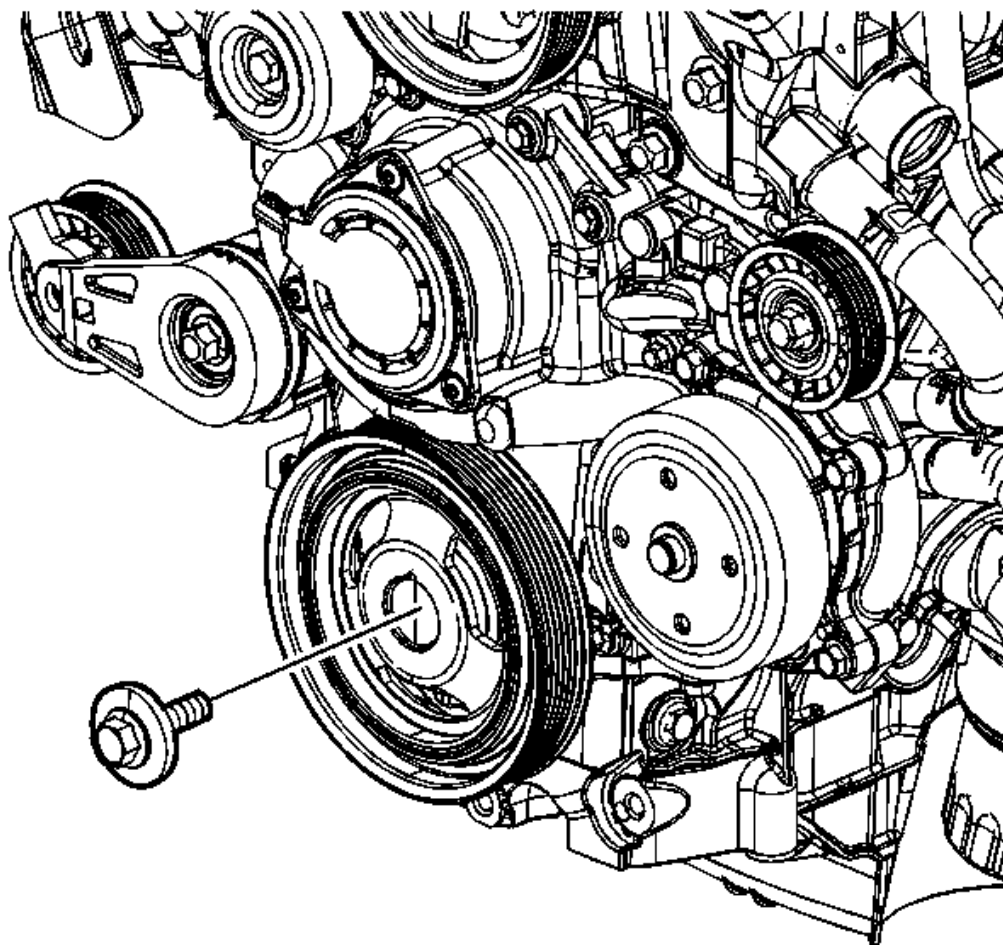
Identifying Crankshaft Balancer Bolt & Washer
